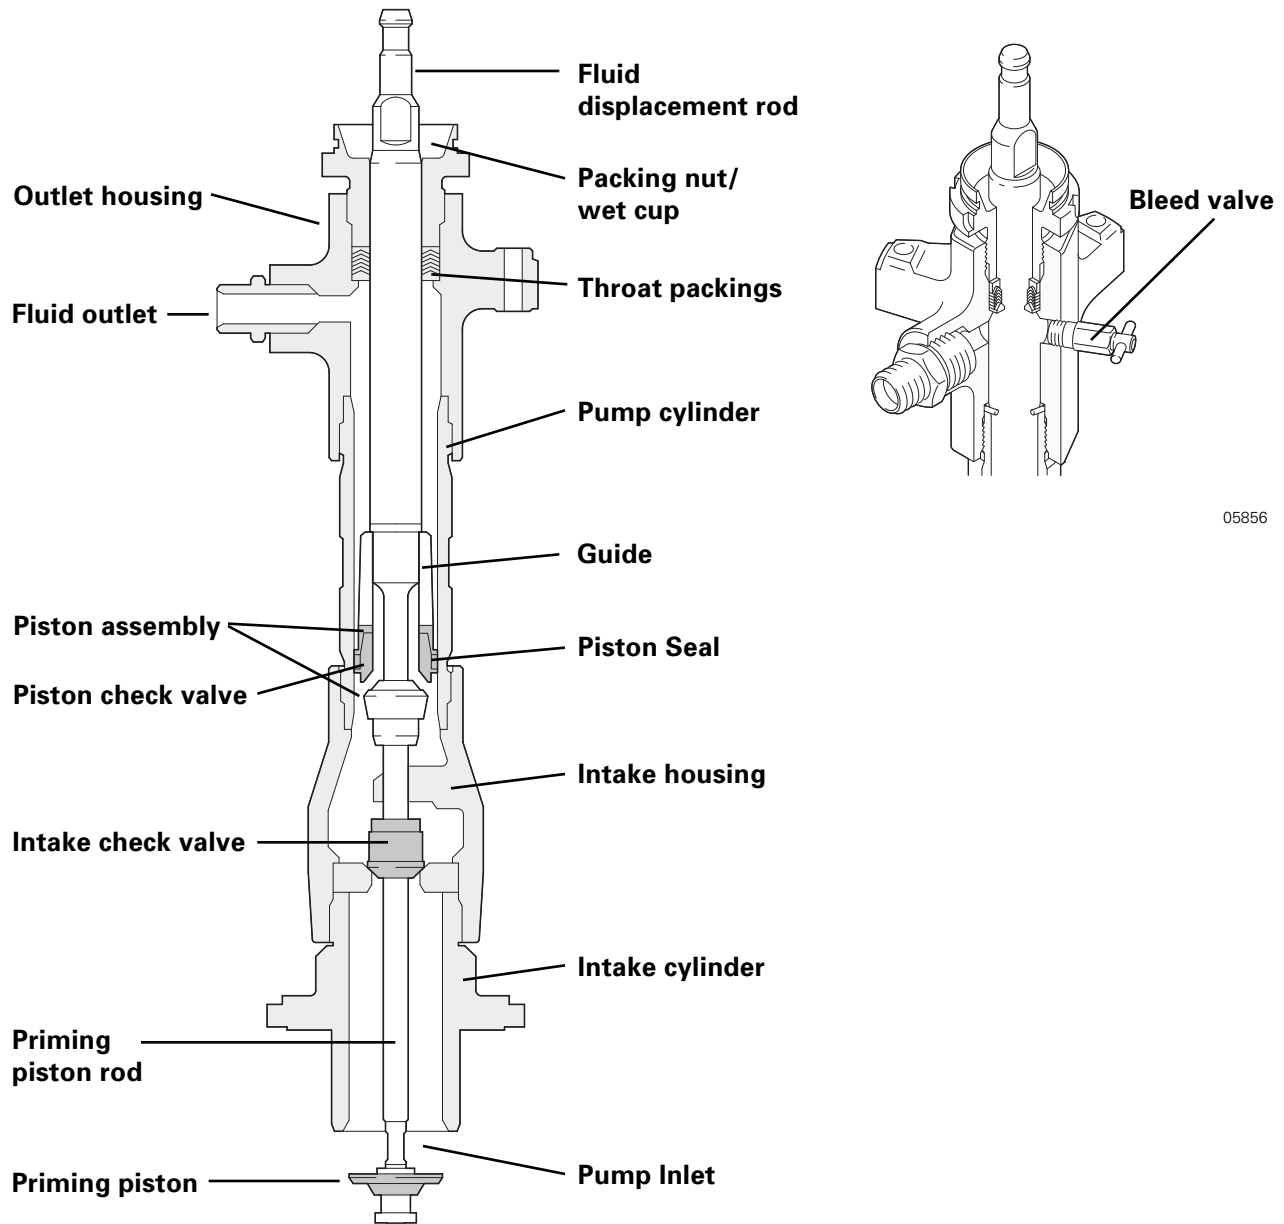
shows the components of a priming piston pump. As you can see, priming piston pumps contain the same basic components that standard two-check piston pumps do. Those components
